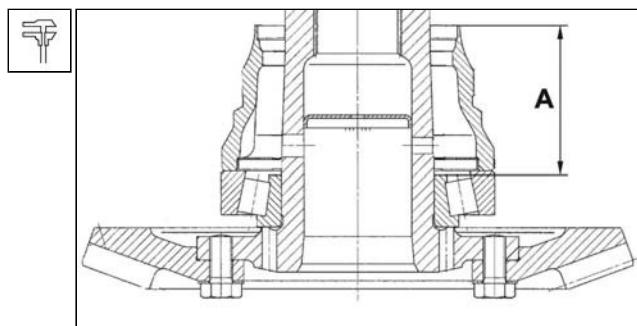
Height of the upper edge of the adjusting sleeve
